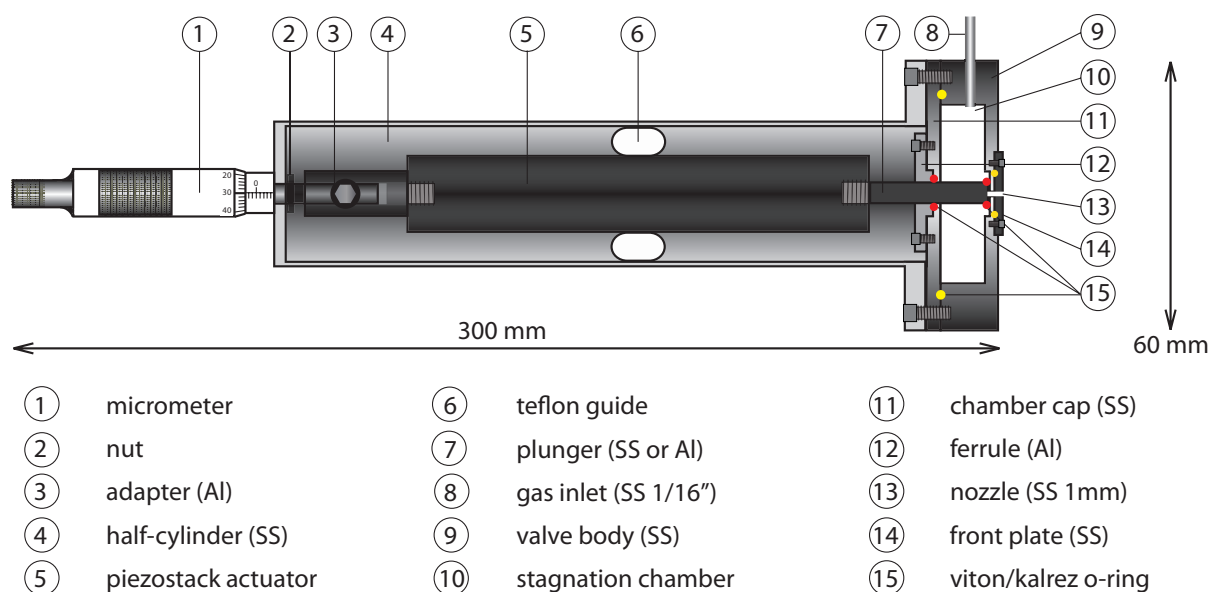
Schematic view of the valve assembly. The piezostack actuator is mounted and aligned outside of a stainless steel valve body in a half-cylinder. The valve is sealed by Kalrez o-rings (yellow spots) both at the tip and at half-length of the plunger. Other o-rings are shown in red.
